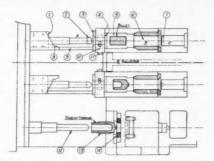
PLAN VIEW OF BULLDOZER TOOLS FOR FRENCH EXTRUSION METHOD
